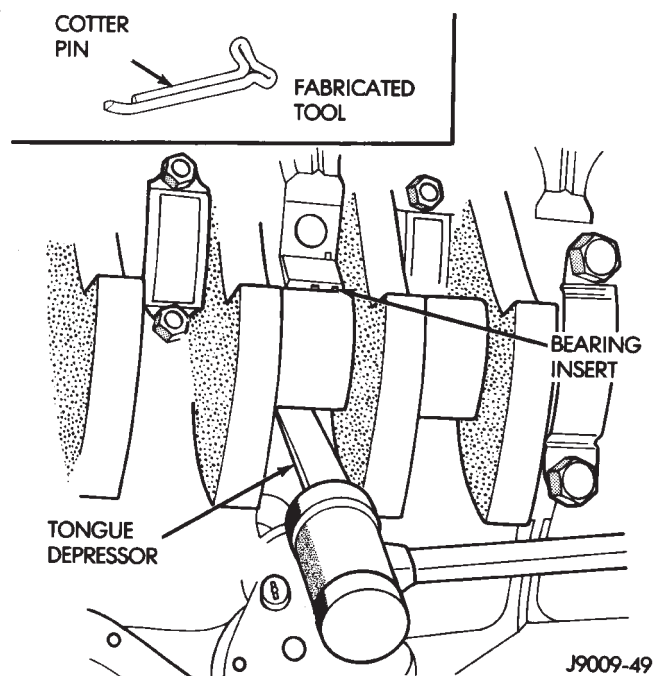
Removing Main Bearing Caps and Lower Inserts
